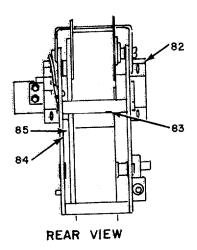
Film Drive Assembly (Sheet 1 of 2).
